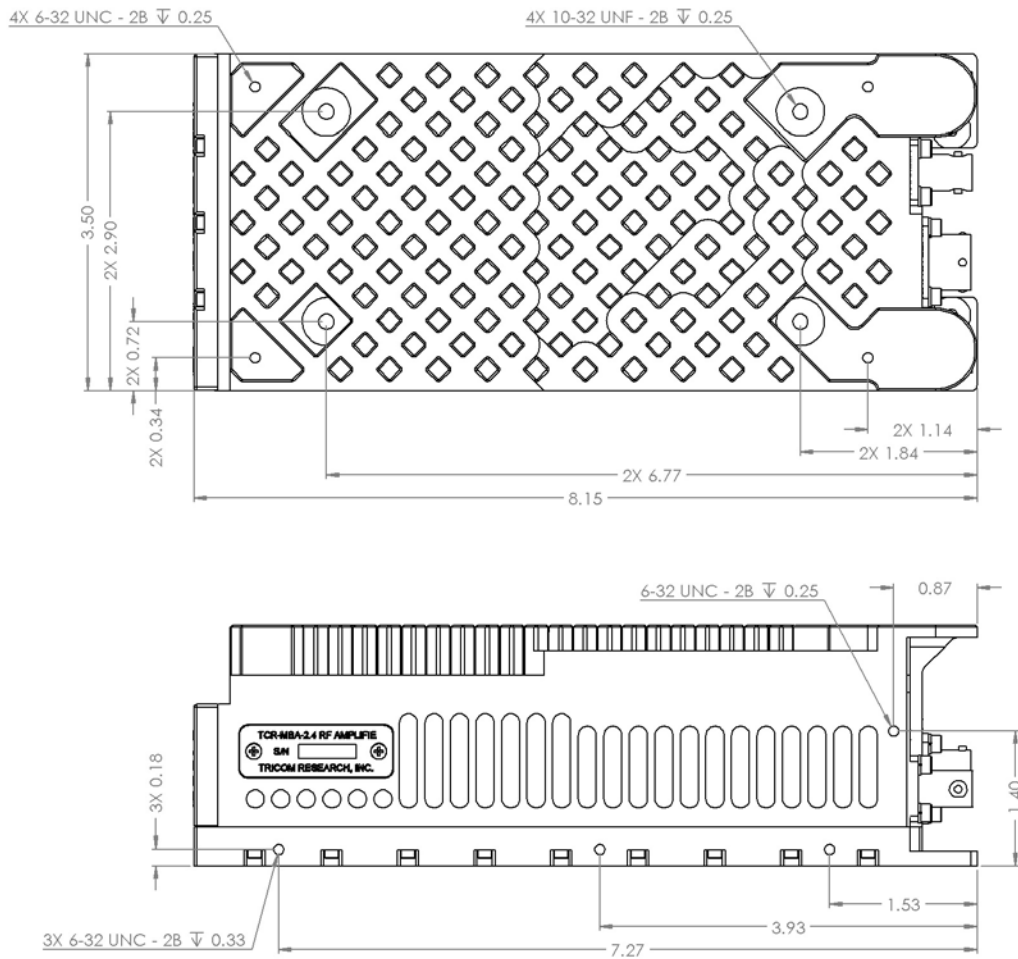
TCR-U/L-25 Outline Drawing (2 of 2)
